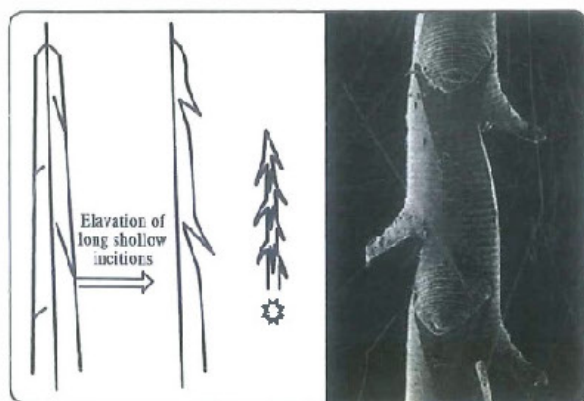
Manufacturing of barbed broach: Elevation of long shallow incisions
